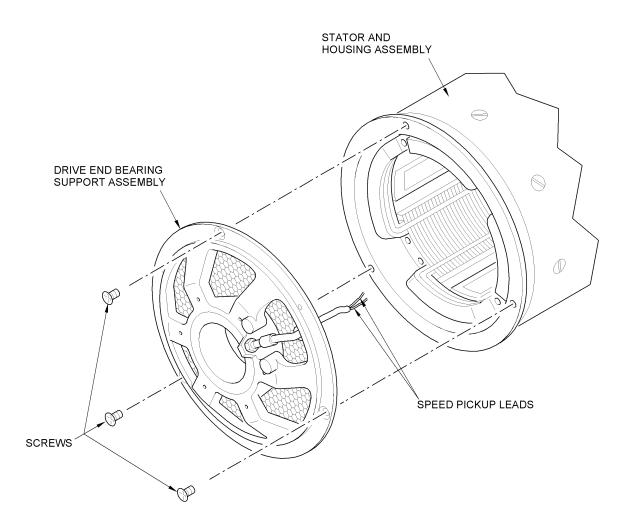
Installing Drive End Bearing Support Assembly (Non-Preload)
